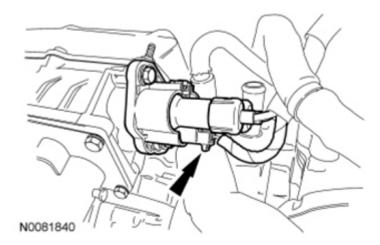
Locating High Voltage Wiring Harness Electrical Connector Courtesy of FORD MOTOR CO.
